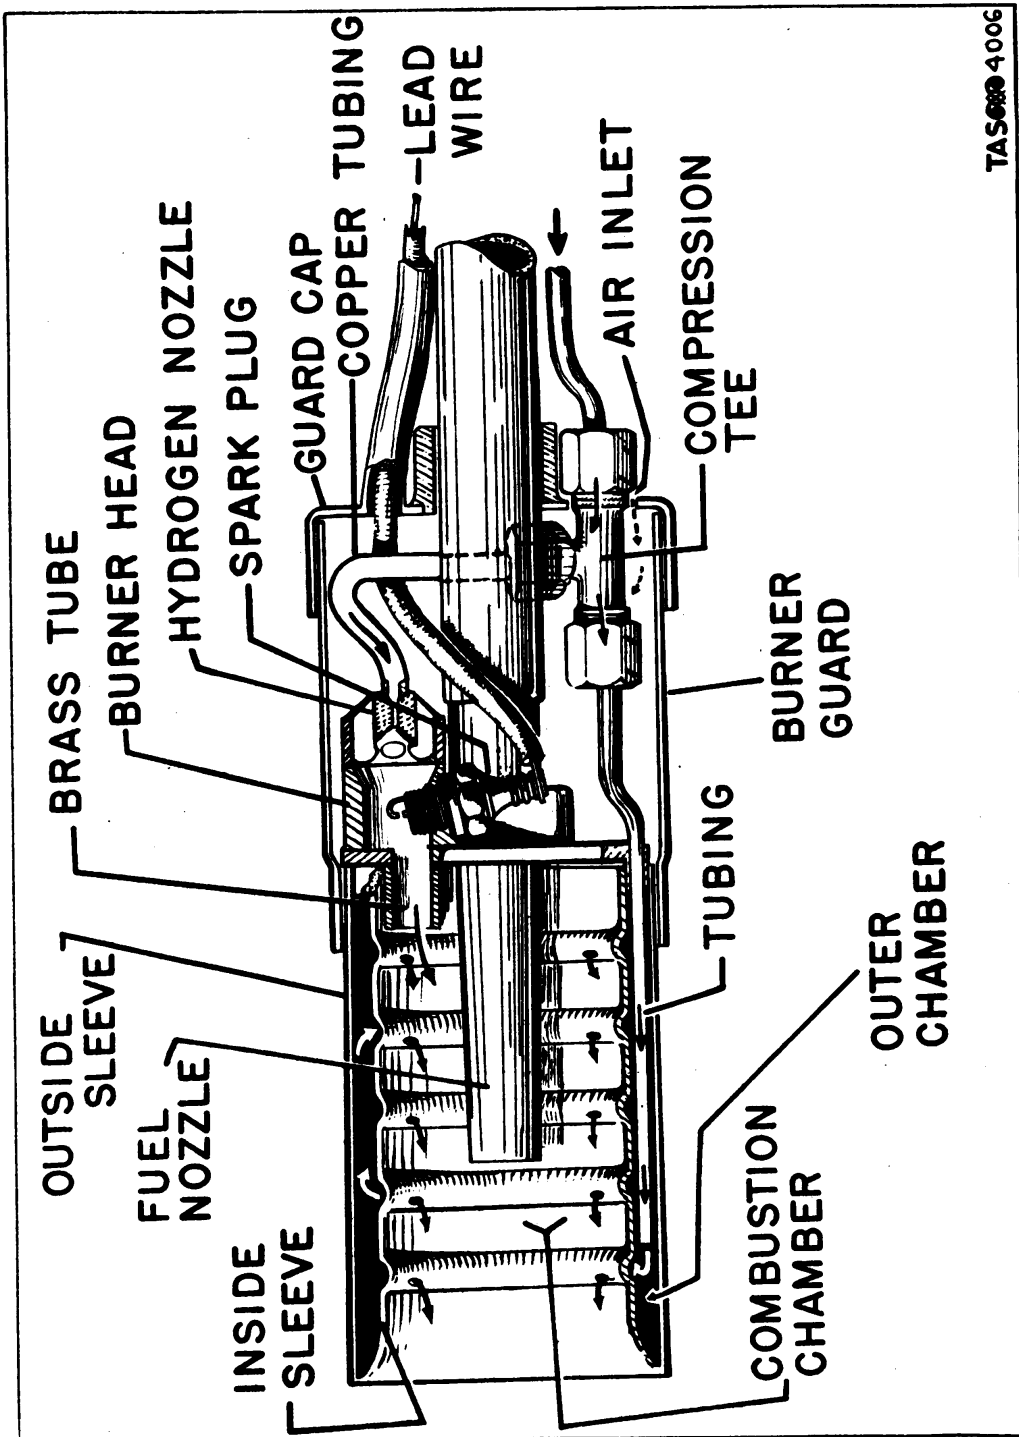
Gas Burner Assembly, Older Type, Cross Section.
